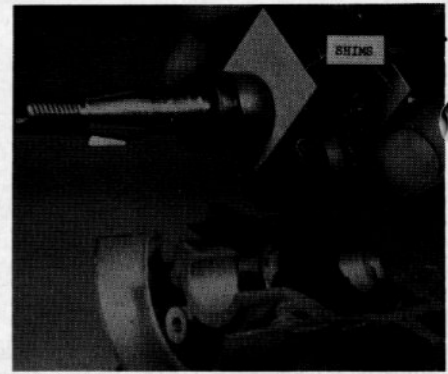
View showing placement of shims (Fig. HL304) between thrust washers (9—Fig. HL303) and bearings (10) for correct crankshaft assembly. Refer to text.
